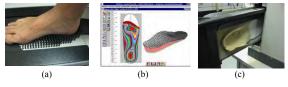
The Amfit® system for manufacturing of soft FOs: (a) foot plantar surface profile measurement device based on elevating contact pins, (b) CAD software, and (c) CNC carving machine for 3-axis milling of FO.
